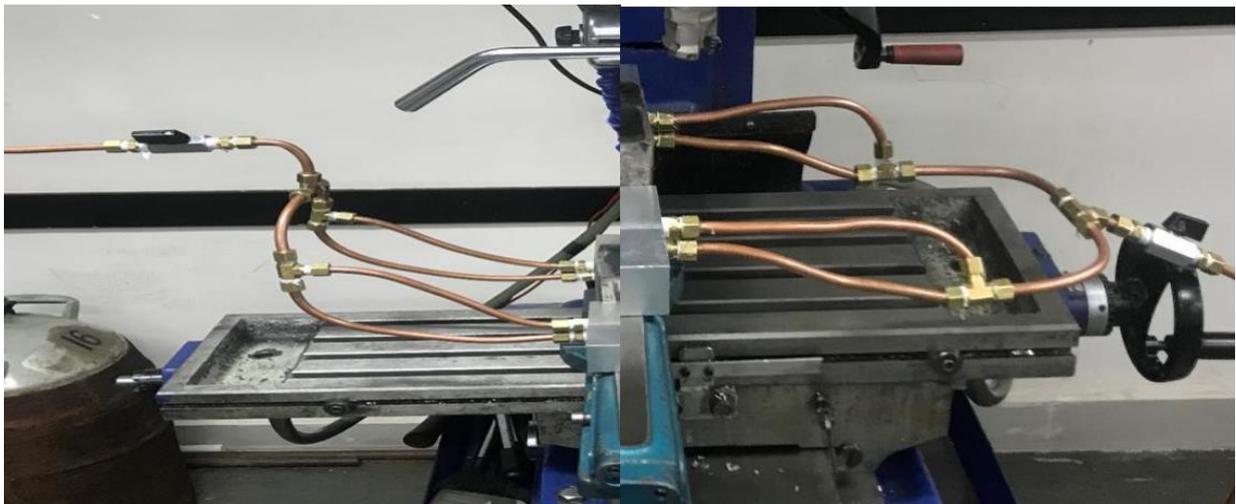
Front view of the assembled indirect cooling fixing system with cooper ducts for LN₂ passage
